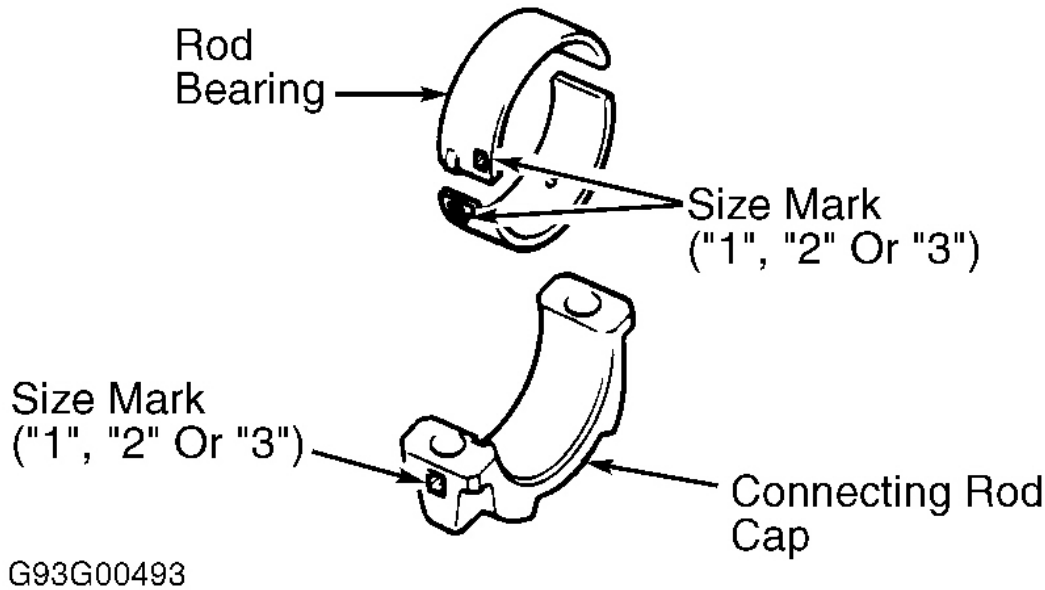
Locating Connecting Rod & Rod Bearing Size Marks
